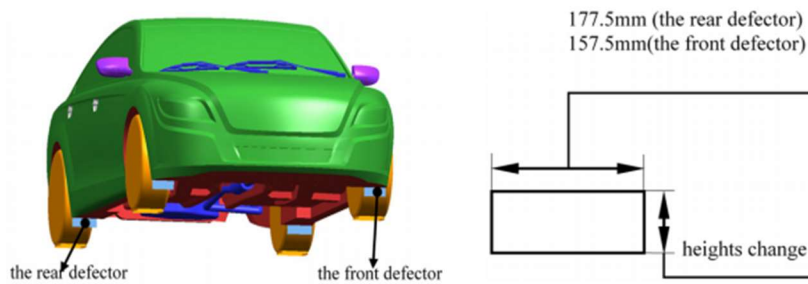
Wheel spoiler assembly drawing of different heights [58]
